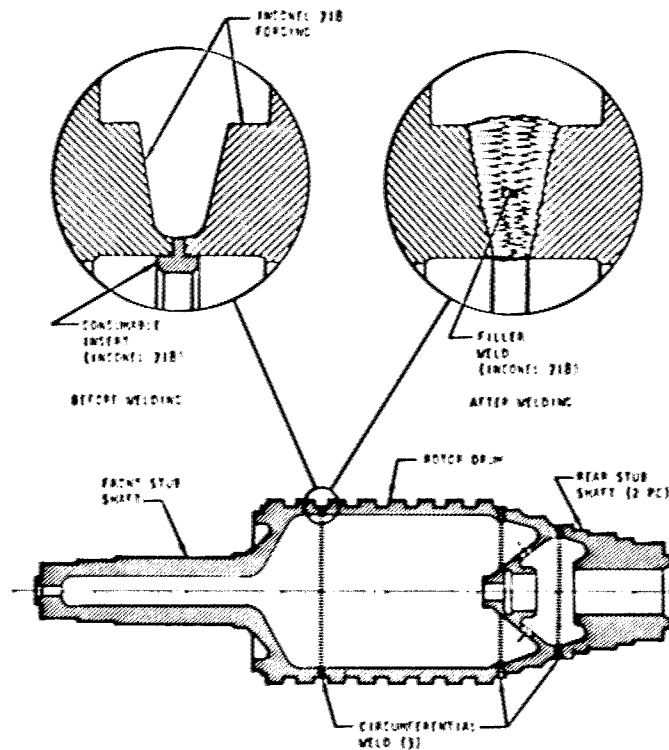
Fabrication of M-1 fuel-pump rotor.
